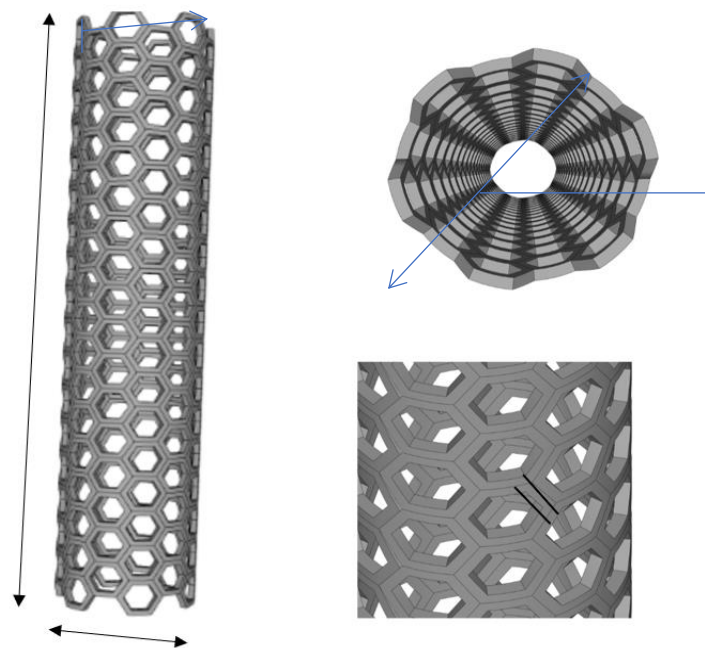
Design 1 - View of CAD Stent design displayed in perspective view and top view
